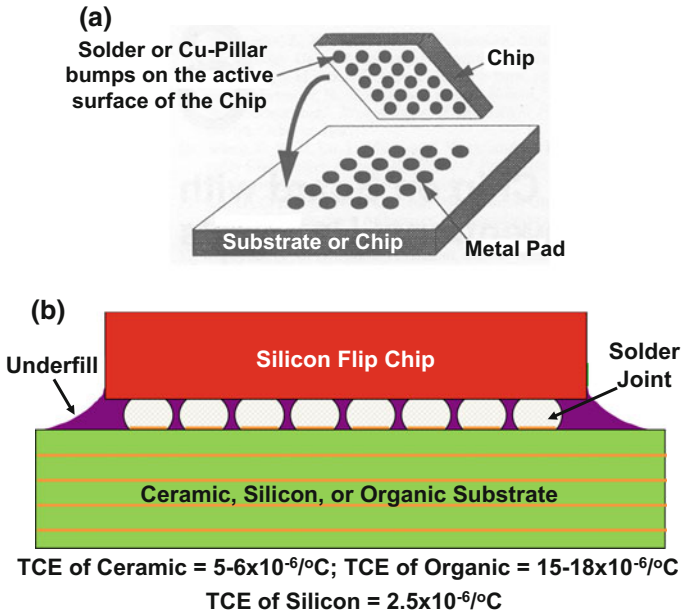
a Definition of flip chip assembly. b Flip chip assembly on various substrates
